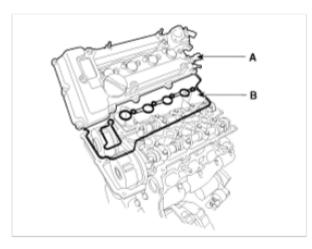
Identifying Cylinder Head Cover And Gaskets Courtesy of HYUNDAI MOTOR AMERICA
